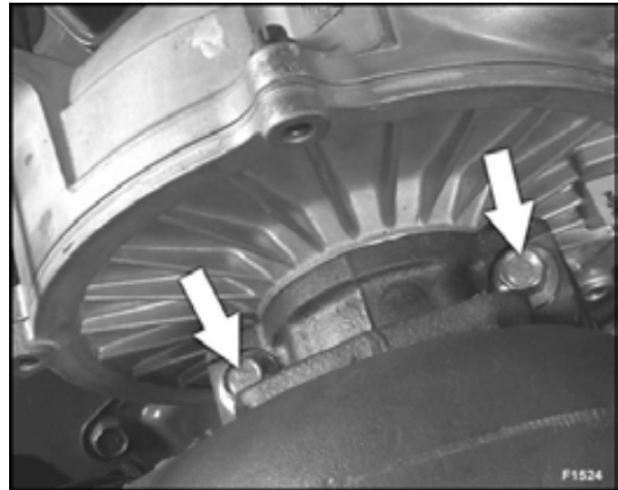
Installing Turbocharger To Pedestal (1998 and UP Model Years Shown)
